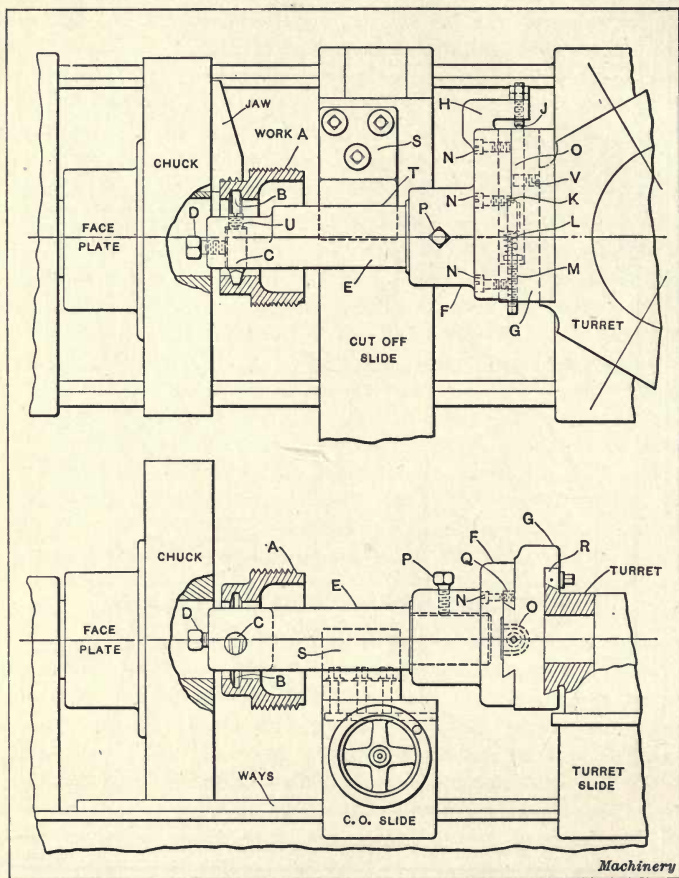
A Recessing Tool for an Automobile Bearing Retainer
